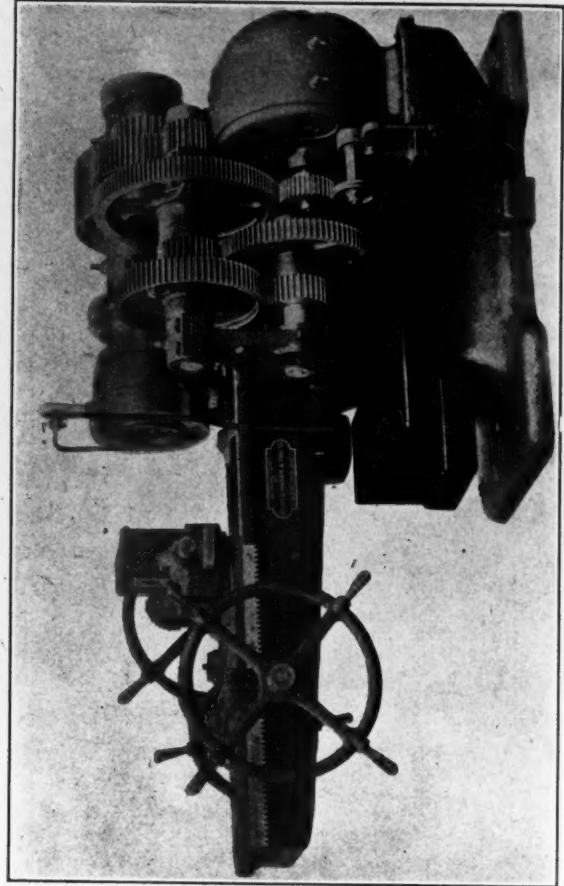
CROCKER-WHEELER MULTIPLE-VOLTAGE DRIVE UPON A 3-INCH BOLT CUTTER.—RELIANCE MACHINE AND TOOL COMPANY.
